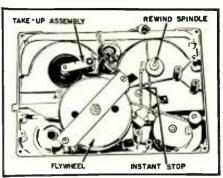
Shown here is a typical method of using a flywheel for driving the takeup reel of a tape recorder. The flywheel is coupled to the motor via an idler.
